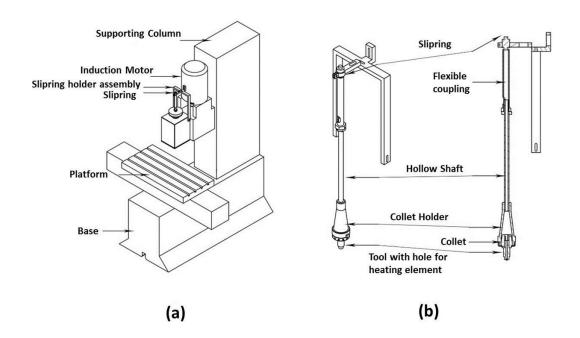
Schematic diagram of the (a) FSW machine and (b) tool holding assembly
